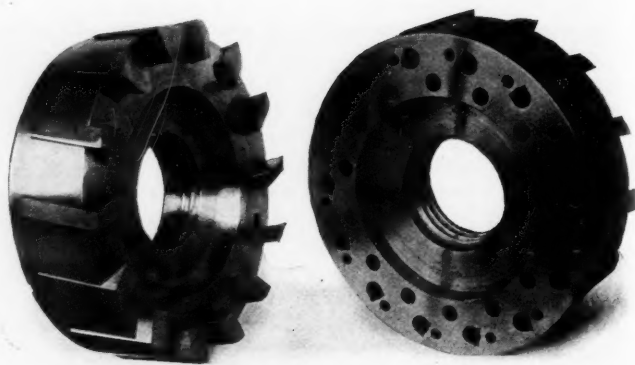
Opposite Sides of the Becker Inserted-tooth Milling Cutter
